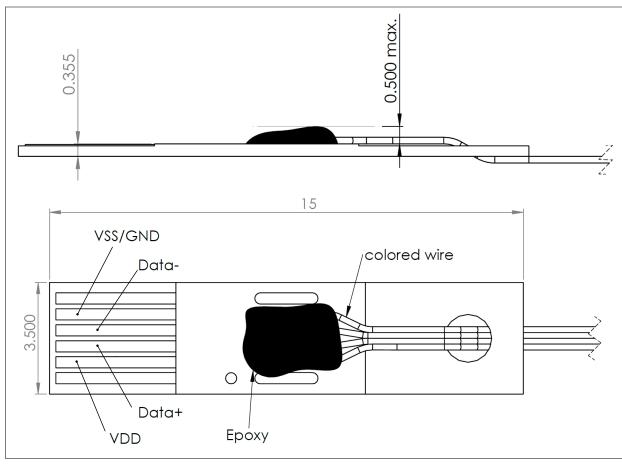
NanEyeM with lens and cable soldered (bended) package outline drawing(1)(2)(3)(4)(5)
